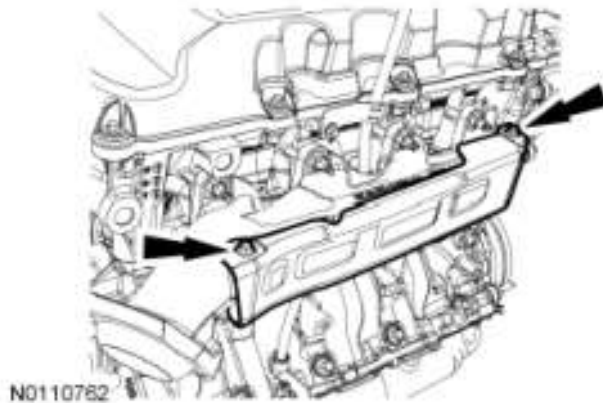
Locating RH Exhaust Manifold Heat Shield Bolts
